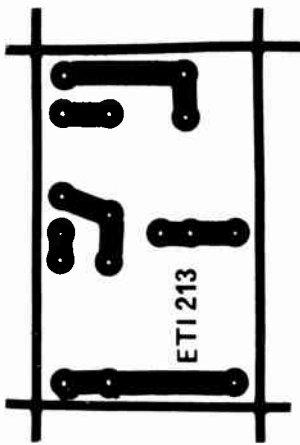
A printed circuit board may be used (foil pattern shown here full size), or the unit may be assembled on tag strips or Veroboard.
